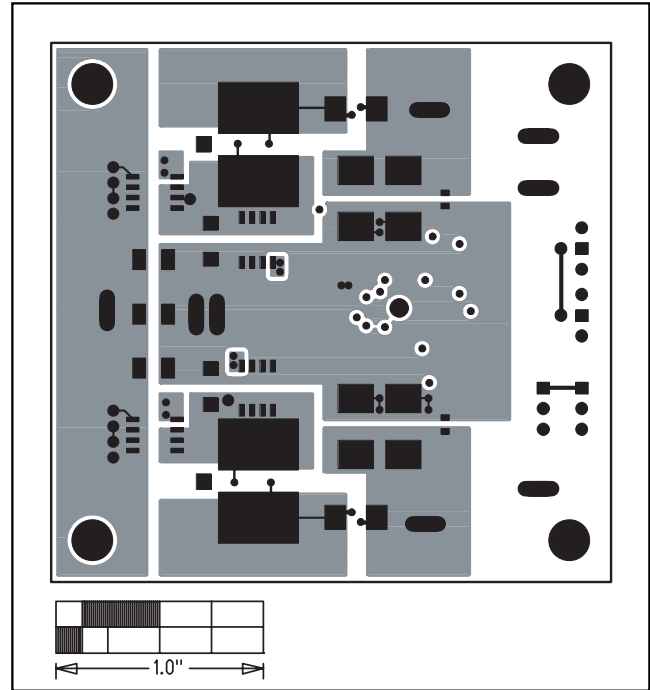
MAX8716 EV Kit PC Board Layout—Component Side
